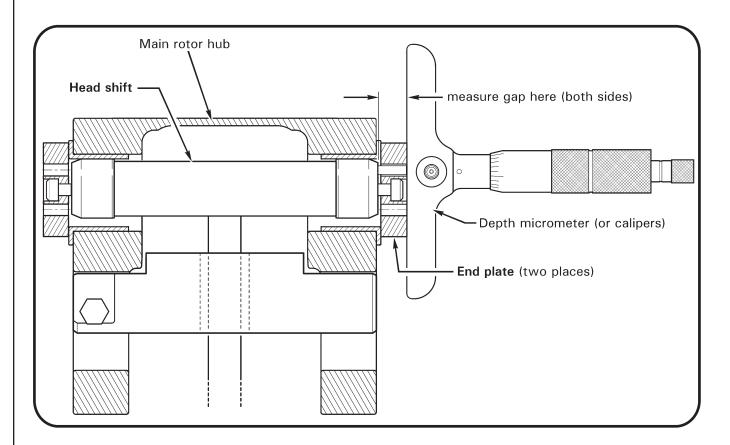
C MEASURING GAP BETWEEN THRUST WASHER AND HUB BEARING
